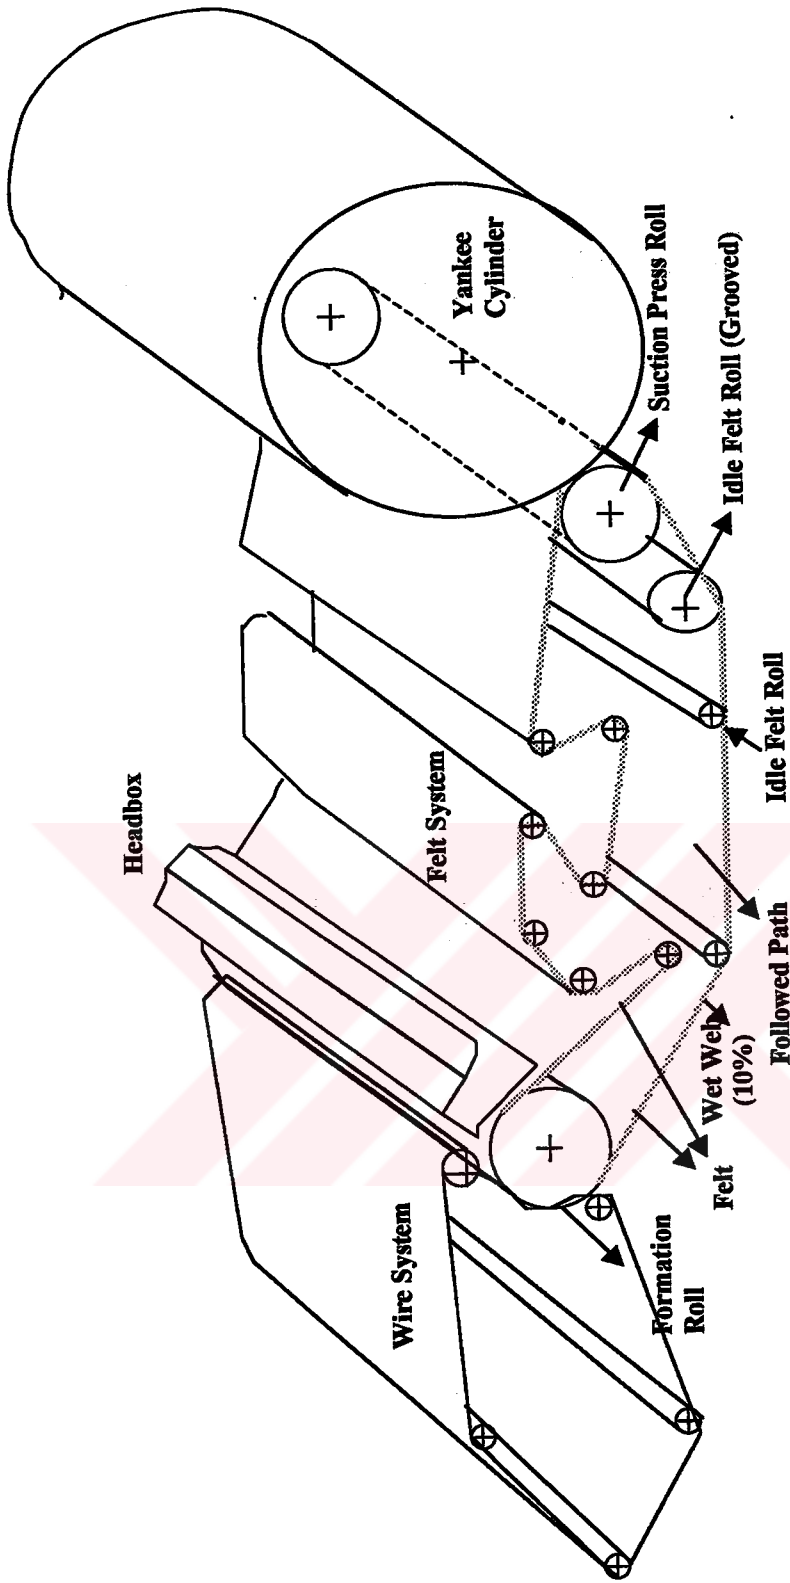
Mechanical Drying Section of İpek Kağıt Second Paper Machine Consisting of the Formation Roll, Wire System, Felt System and Suction Press Roll.
